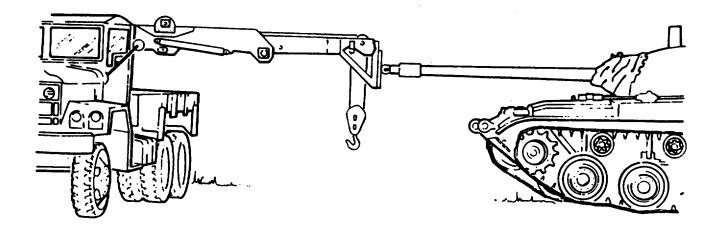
Exercising Recoil Mechanism of Combat Vehicle with Wrecker and Improvised Exercising Bracket (M62 Wrecker Shown)
